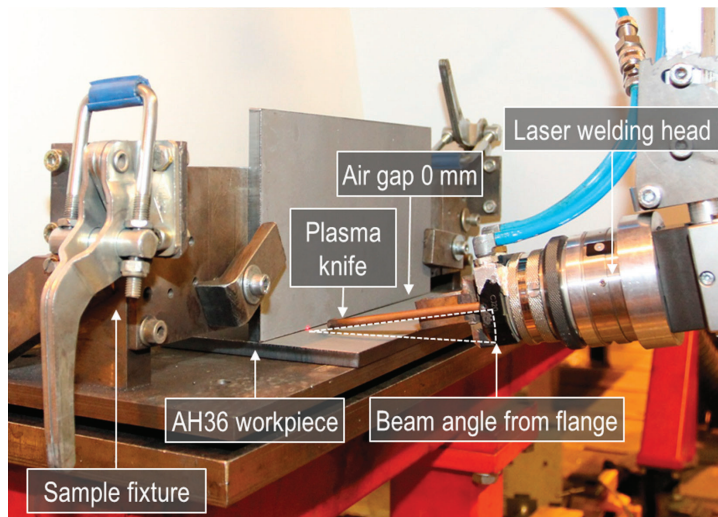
Experimental setup for laser welding of T-joints. Beam is positioned at the joint plane (offset 0 mm).
